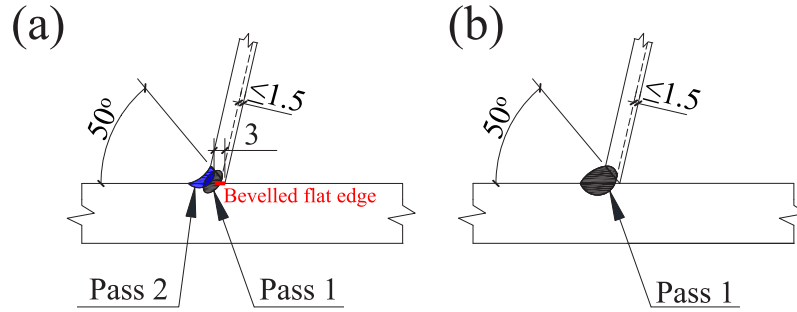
Welding procedure of: (a) W1; (b) W2 (unit: mm).
